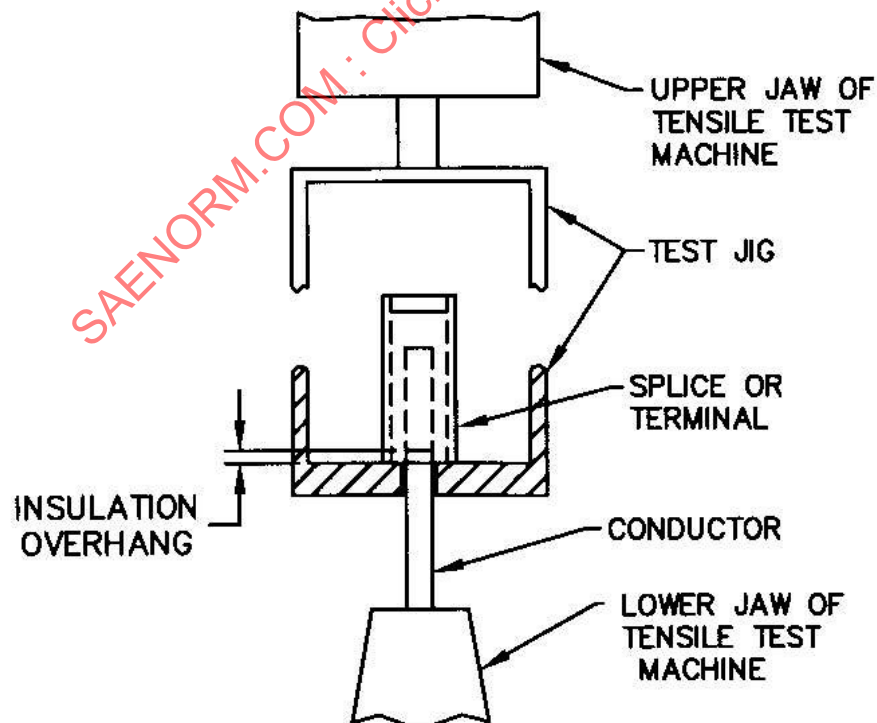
SET UP FOR AXIAL LOAD TEST (CRIMPED SPECIMENS)
